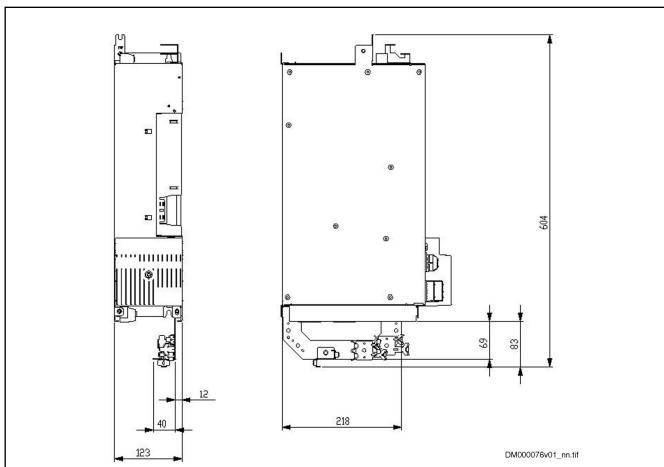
Dimensional drawing HCS03.1E-W0070 with HAS02
